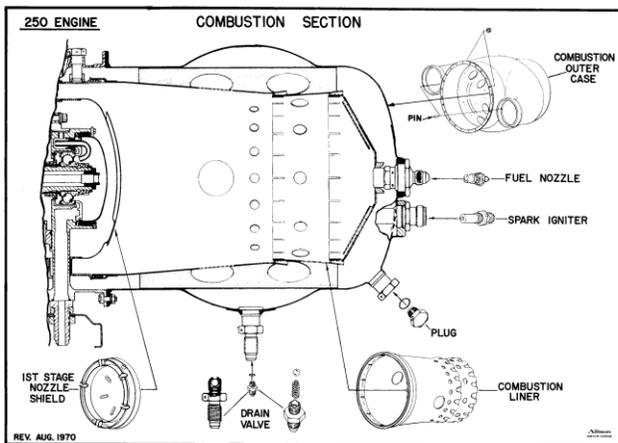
DETAILED DRAWING OF T63 COMBUSTION SECTION
